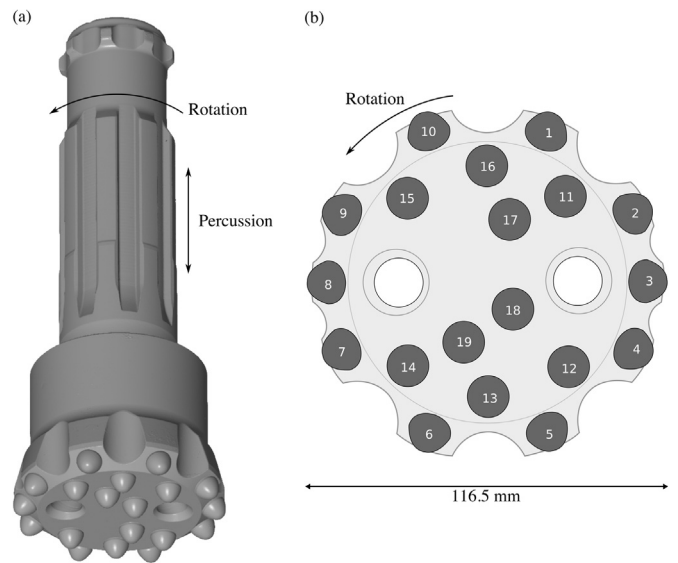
(a) Drill-bit used in the full-scale field drilling tests. (b) Frontal view of the drill-bit crown equipped with 19 parabolic spherical-tipped cemented tungsten carbide inserts (in dark grey).
